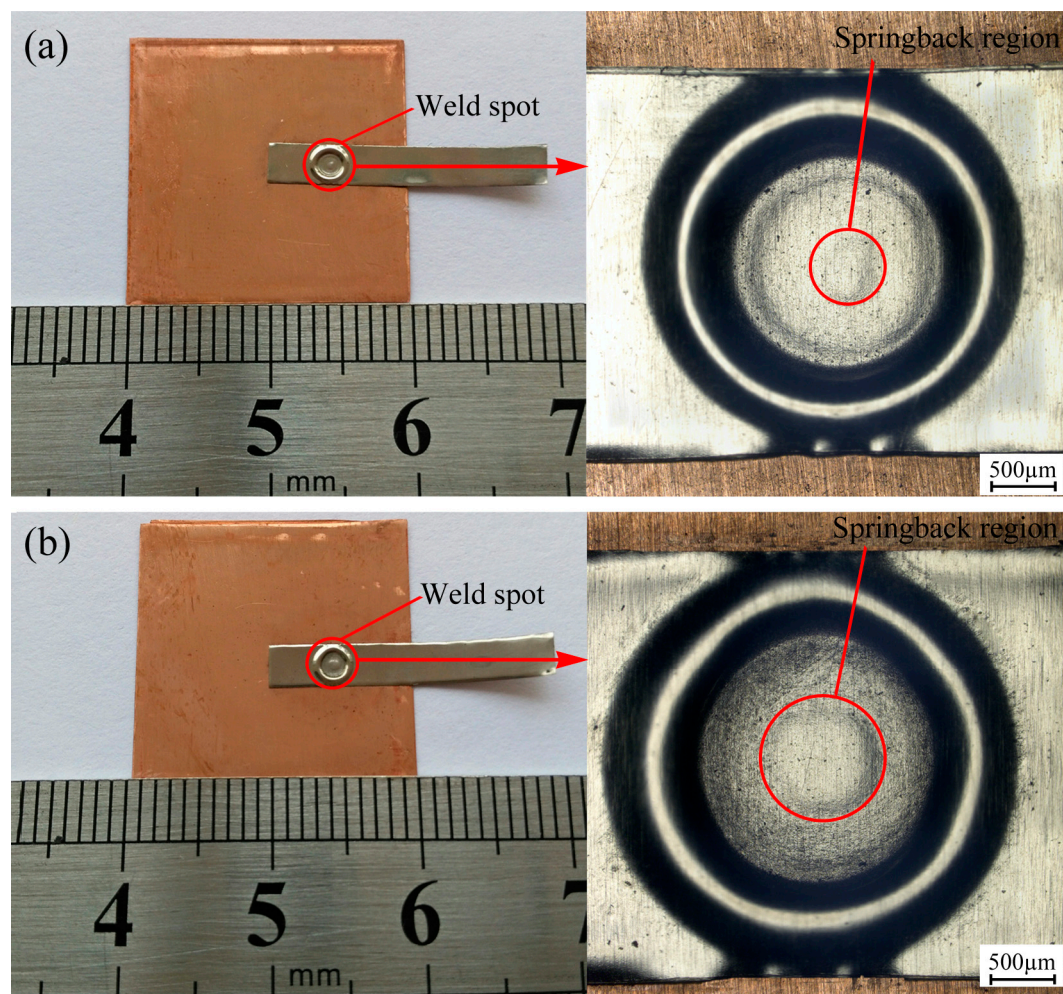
Weld samples and weld spots morphology from the laser impact spot welded joints at different laser pulse energies: (a) 565 mJ; (b) 1550 mJ.
